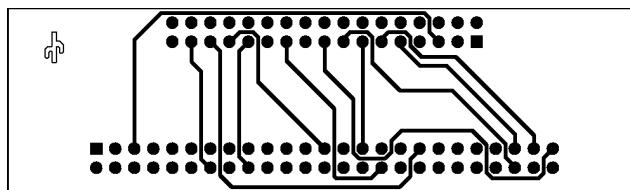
Bottom Layer of DEM-DDC112 Cable Interface Adapter
